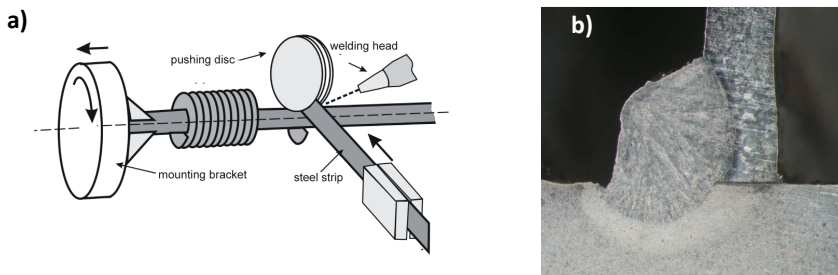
GMAW welding of finned tubes with fillet weld (a); fin-tube fillet joint (b)
